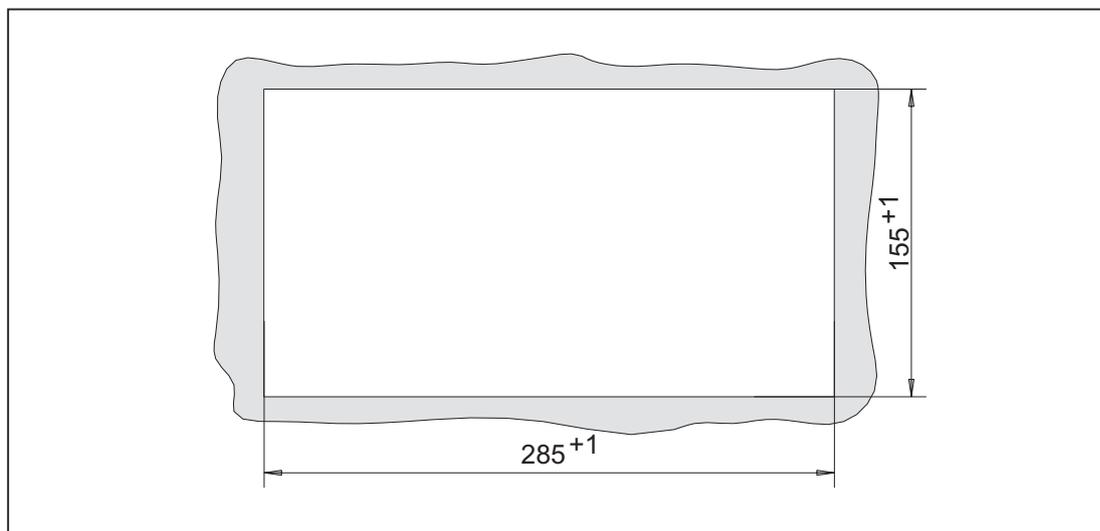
Panel cutout for machine control panel MCP 310 PN
